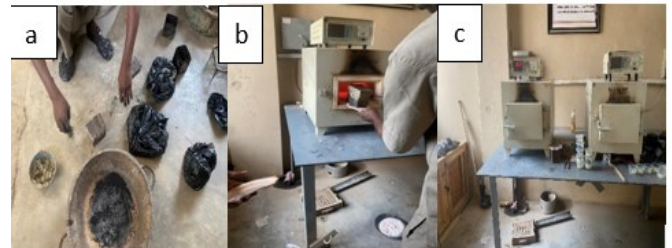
(a) Mixture of Sheanut shell ash and eggshell ash; (b) Charging of Carburized box into the furnace; (c) Induction furnace with Carburizing box.
